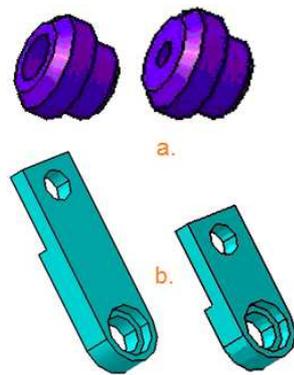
a. Bush guide, different diameters; b. Bush support plates.
